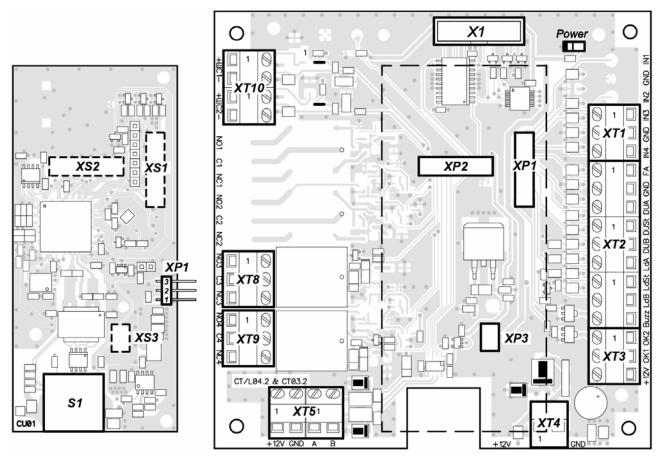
CT-03.2 controller circuit boards (upper and lower)
